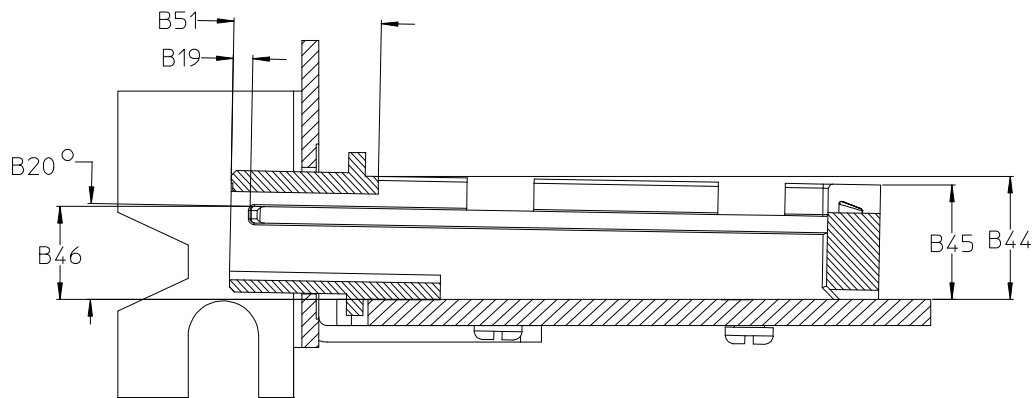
x4 (1°) EMI Guide Housing Assembly Section Side View
